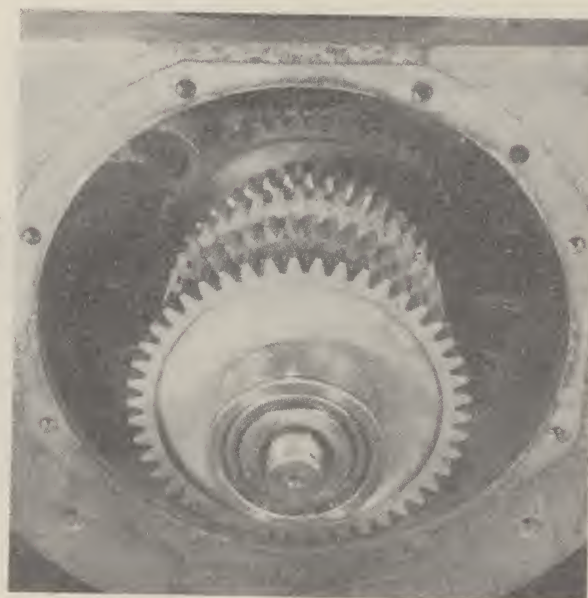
Super 99 four speed transmission with front cover removed showing bevel pinion shaft and gears assembly.
